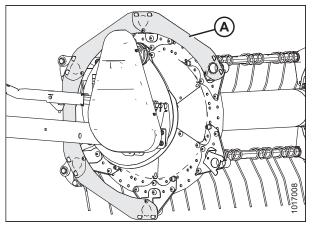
Partially Installed Reel Endshield – Cam End Shown, Tail End Similar
